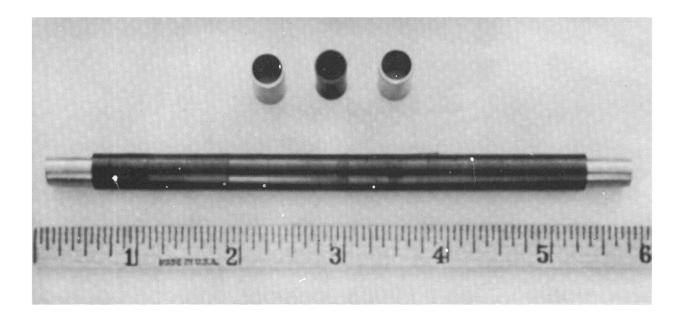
Assembly of BETT 69-1 Pellets on Inner Tube
